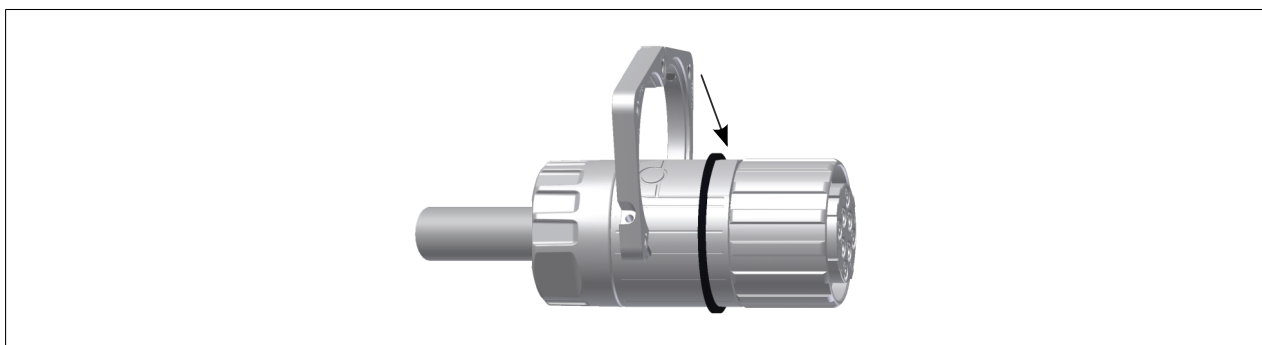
Attaching the metal flange to the connector (rear panel installation)
